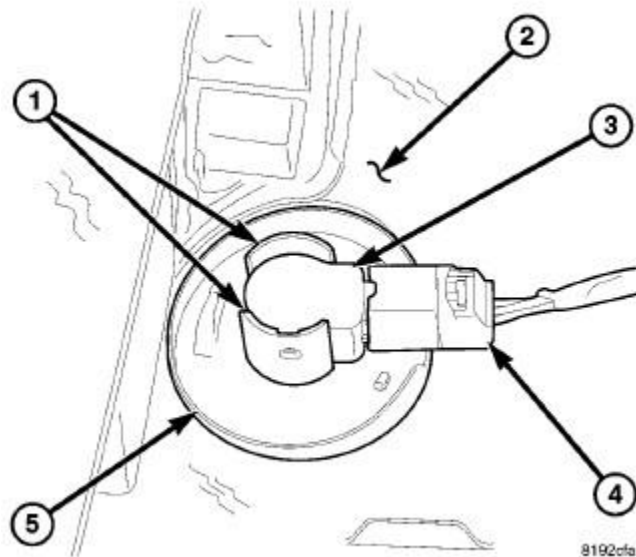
Identifying Latch Features, Rear Bumper Fascia, Park Assist Sensors, Park Assist Sensor
